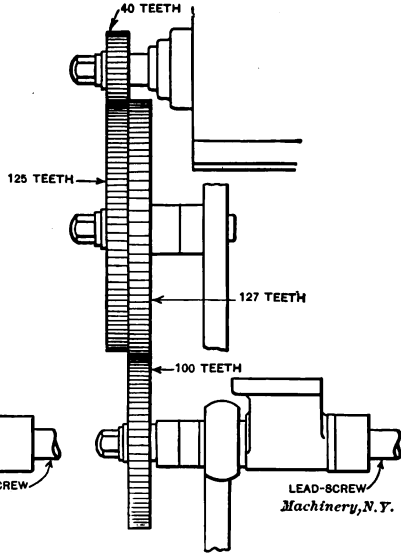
Cutting an English Thread with a Metric Lead-screw
